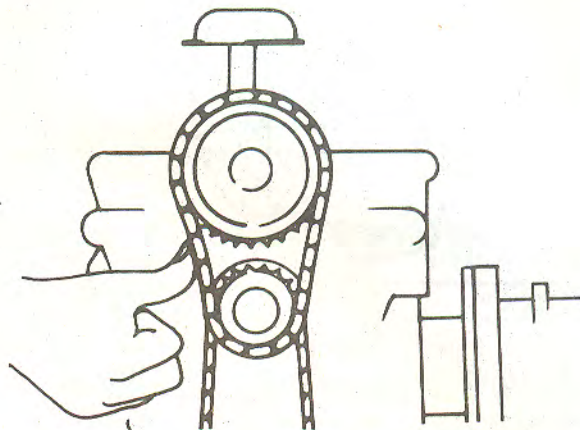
Checking the oil pump drive chain tension by depressing the chain at the point shown.
